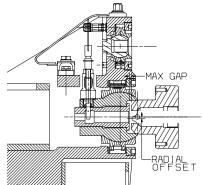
Z1 Shear Cylinder Entering P6 Ball/Nut, at Ready to Bolt Configuration
